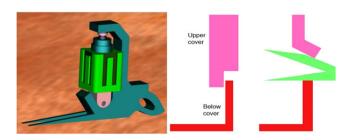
Separating tools [Colour figure can be viewed at wileyonlinelibrary.com]
